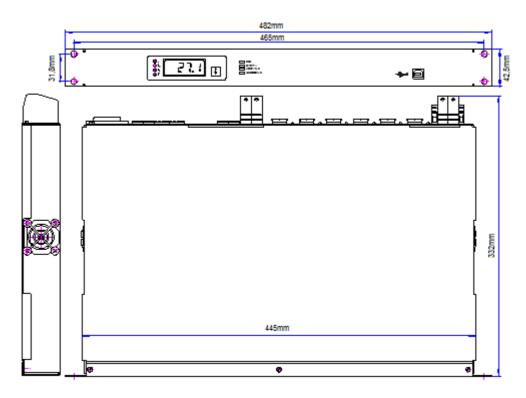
View and nominal dimensions of CHARGER 6 power supplies.
